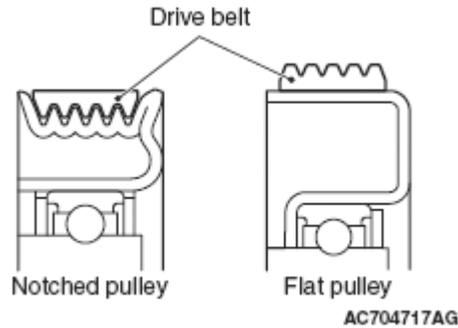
Checking Drive Belt Center Of Flat Surface Of Flat Pulley
